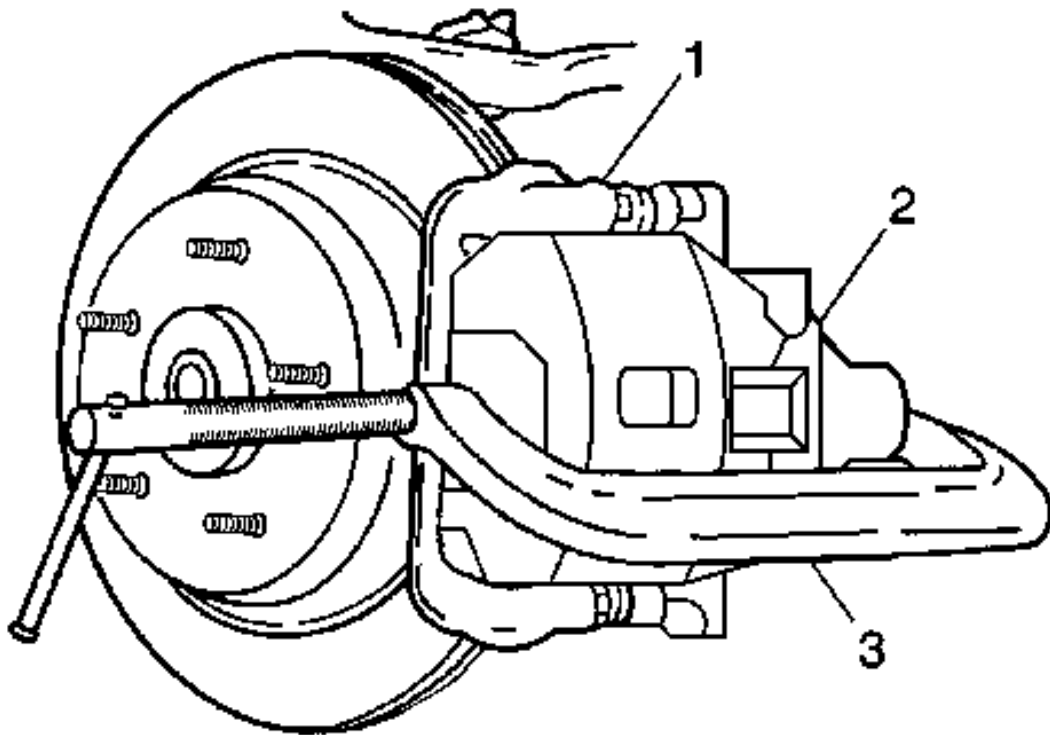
Applying C-Clamp To Compress The Caliper Piston - Rear
